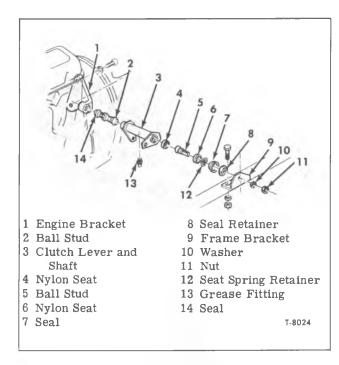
Clutch Lever and Shaft Components (CE, ME60 with 427 Engine)
